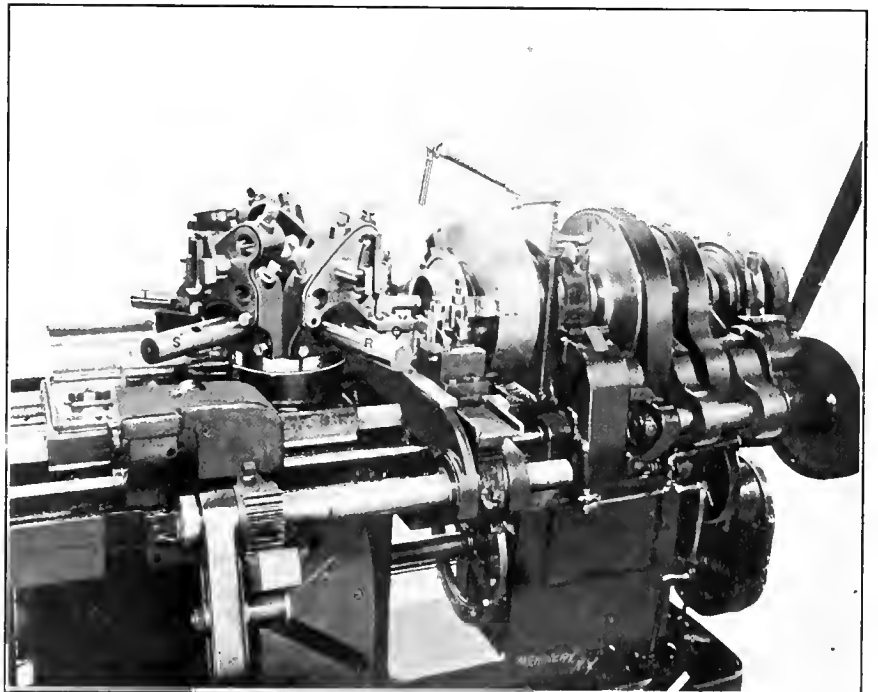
Rear View of the Machine, set up as shown in Fig. 13
